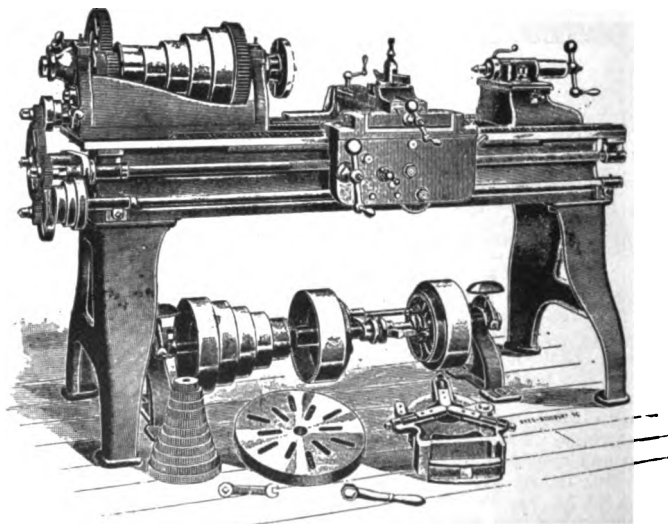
16 INCH SWING ENGINE LATHE WITH ELEVATING OIL REST
